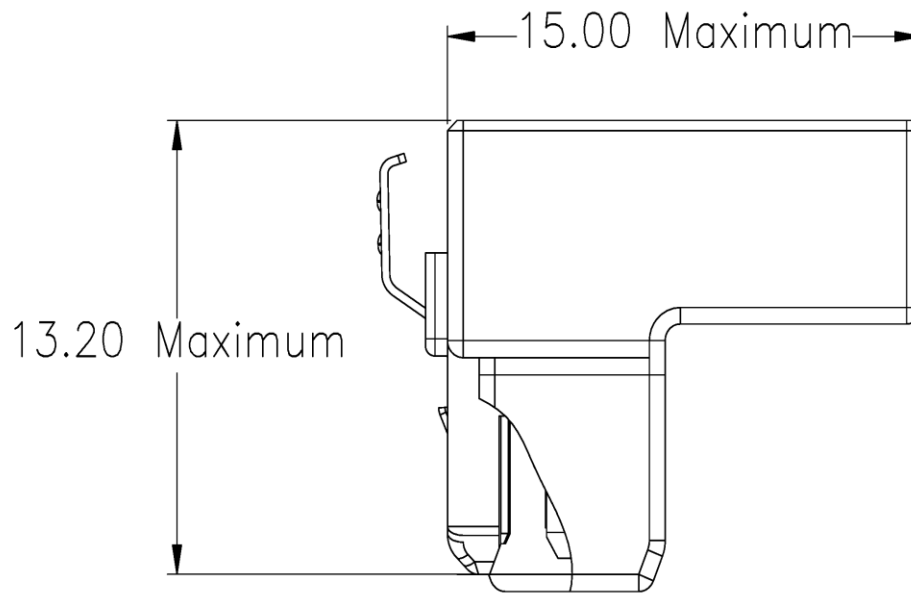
Right Angle Plug for 38/74/124/148 Contacts
